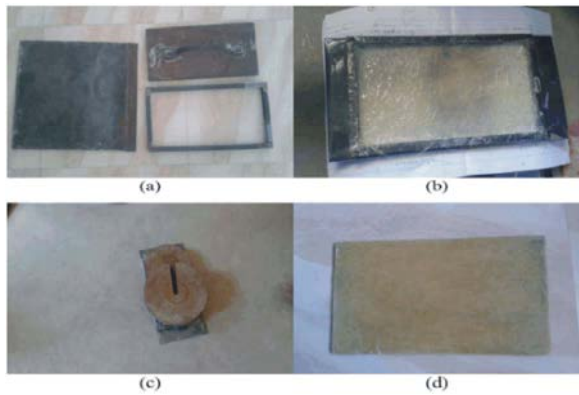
Fabrication Steps (a) Mould plate, Frame and Die (b) Sample on the mould (c) Weight on Mould (d) Hybrid Composite Material Specimen
